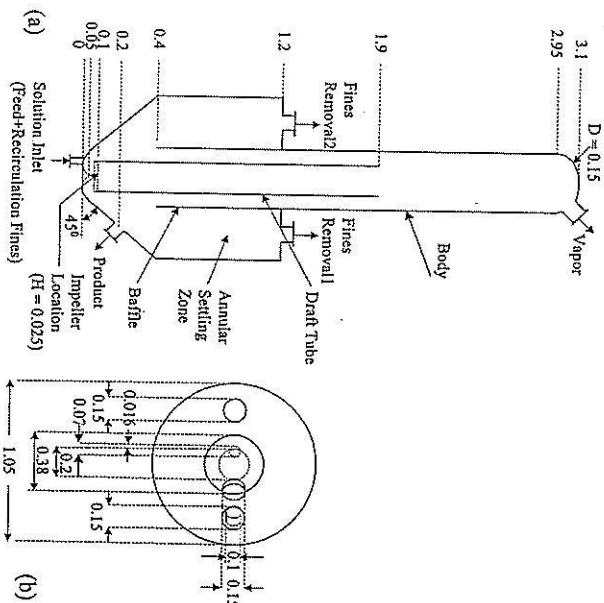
DTB crystallizer geometry and dimensions. Dimensions are given in meters: (a) side view; (b) top view.
